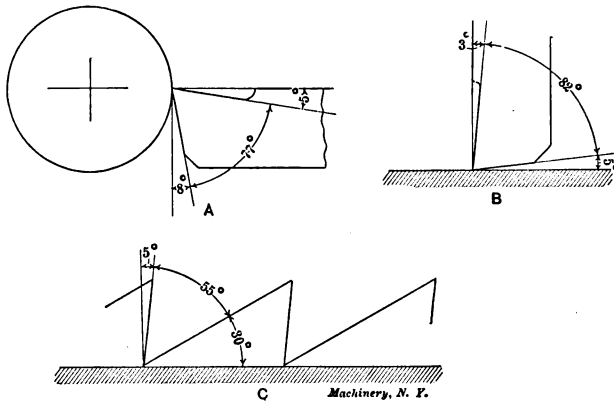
Cutting Angles of Planer Tool, Lathe Tool and File
